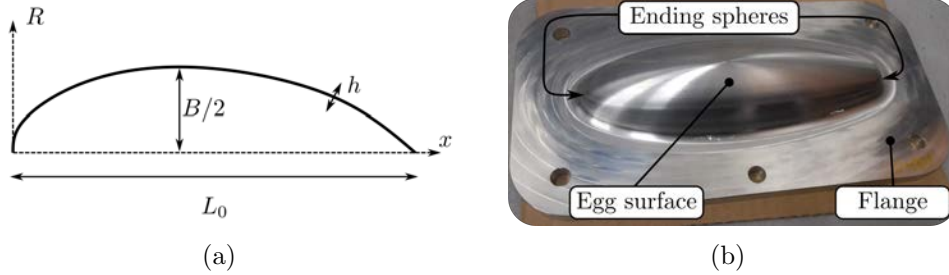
(a) Egg geometry; (b) Egg specimen after machining
